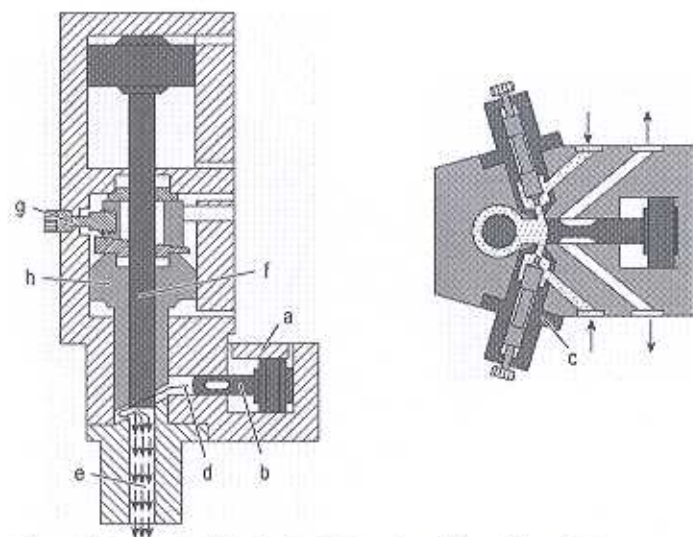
L-shaped mixing head with ring throttle (type Hennecke)
